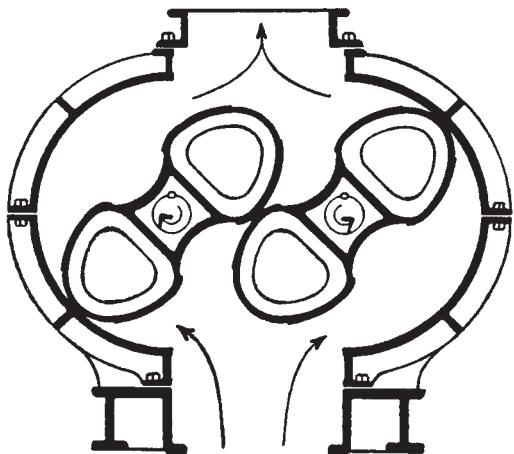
Two-impeller type of rotary positive-displacement blower.
